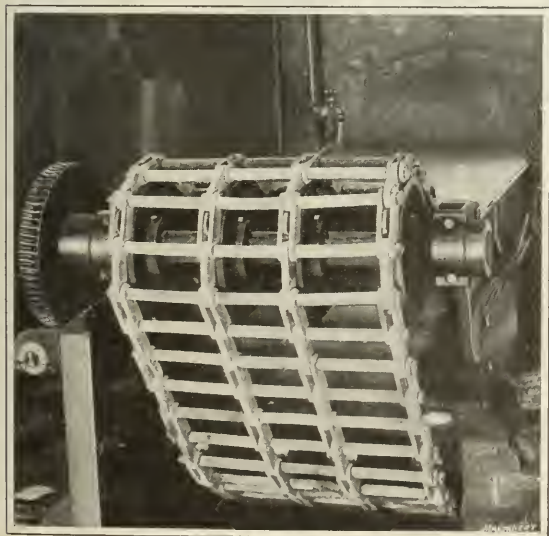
End View of Wire Annealing Furnace equipped with Nichrome Conveyor Chain
